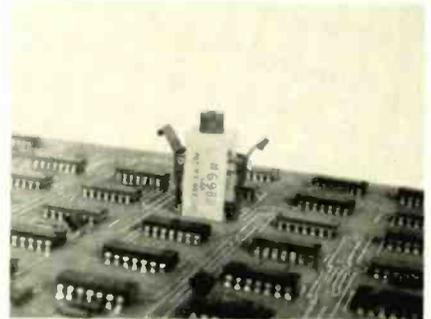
DIP EXTRACTOR is spring loaded and pulls out the IC as soon as the solder melts.
